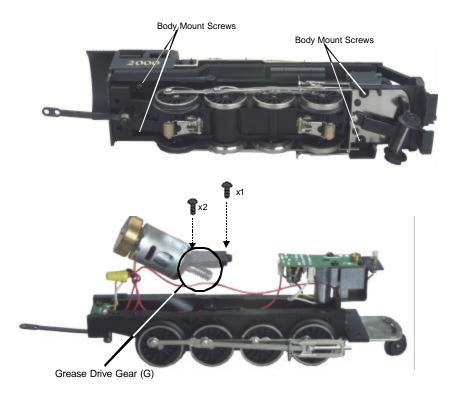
Locations of the Body Mounting Screws and Adding Grease to the Gear Box
